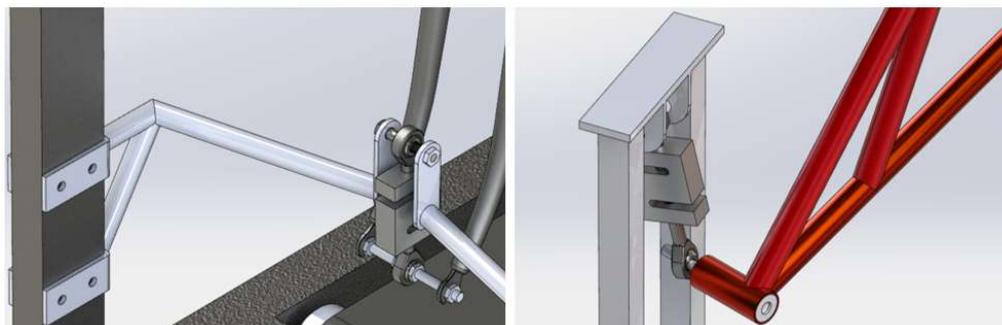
Assembly of the load cells on the front support (left) and rear support (right)
